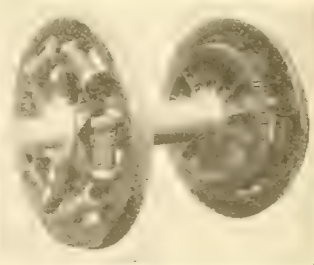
WHEELS AND AXLE WITH QUILL AND HELICAL SPRINGS
